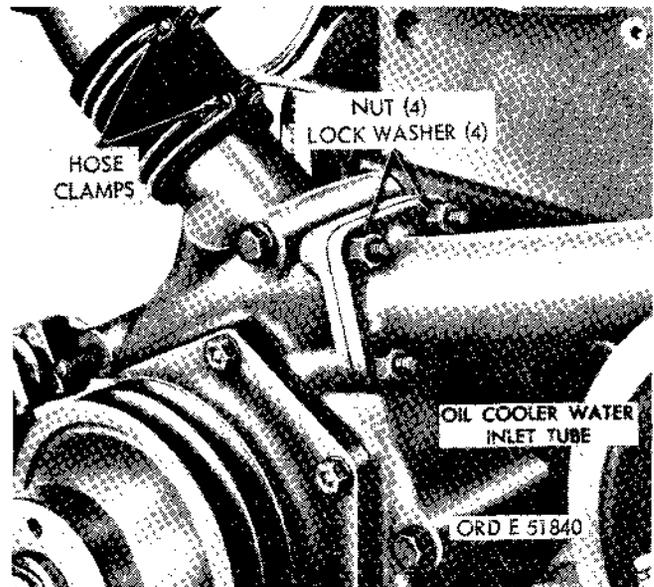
Disconnecting thermostat housing-to-coolant pump hose and oil cooler inlet tube—multifuel models.
